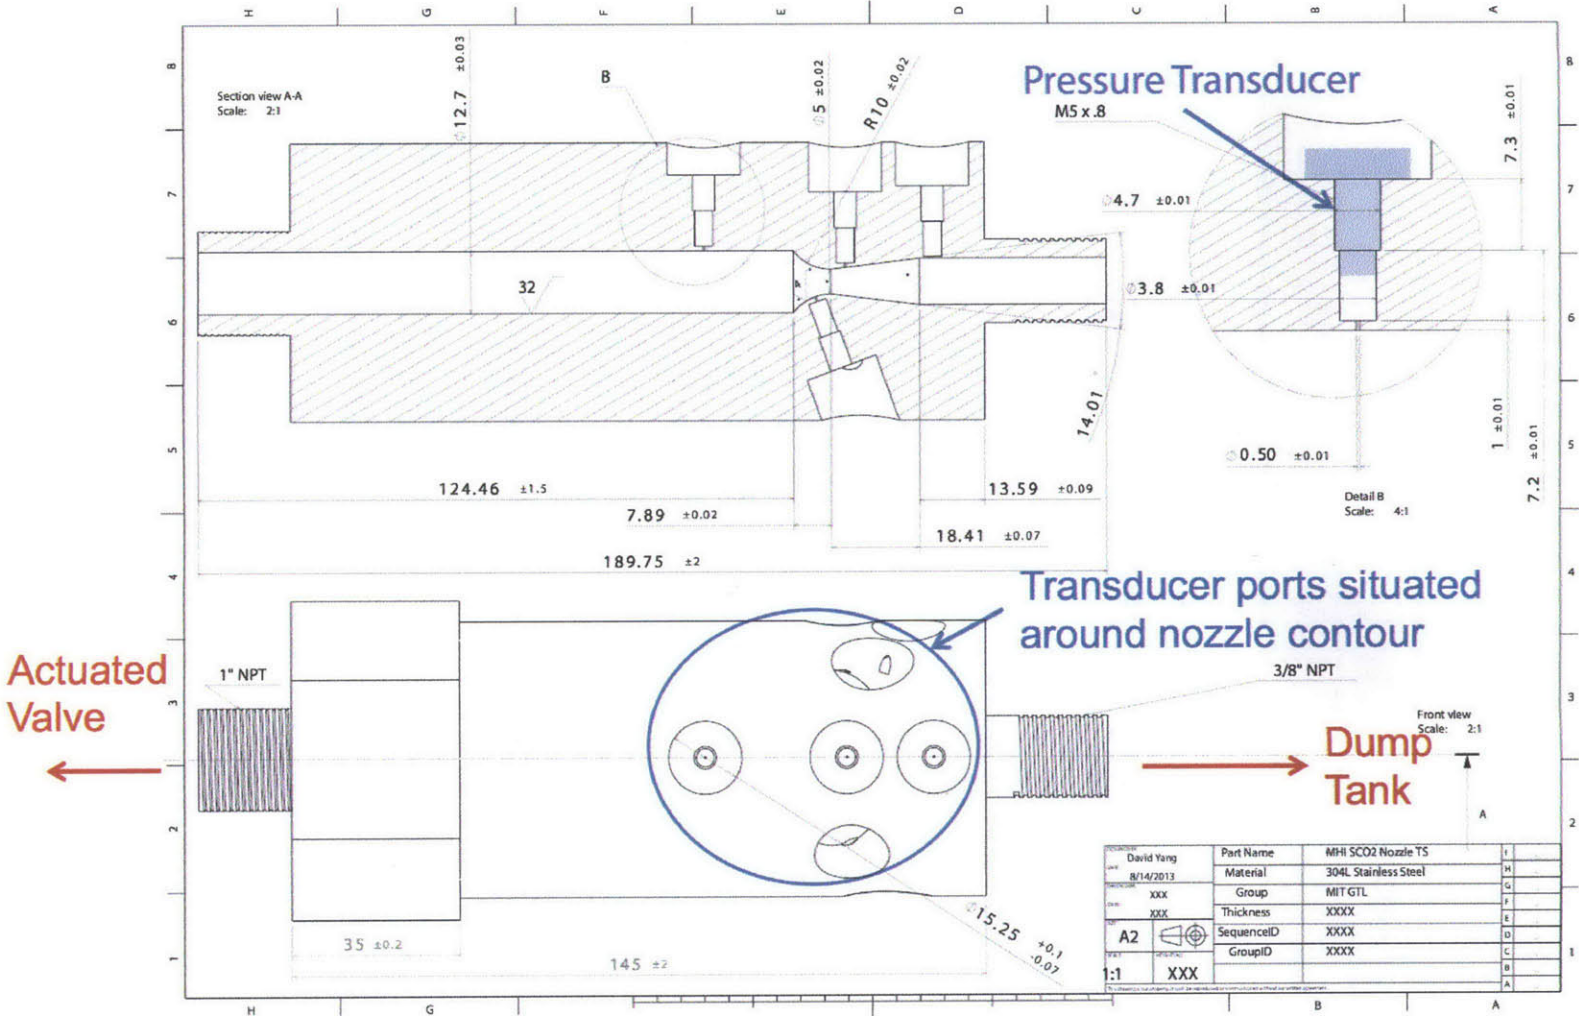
Technical drawing of test section with converging-diverging nozzle.
